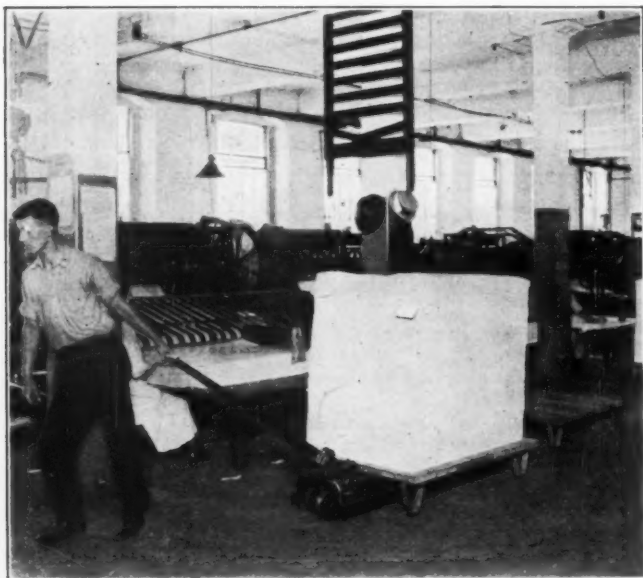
REHANDLING WITH AN ELEVATING TRUCK
